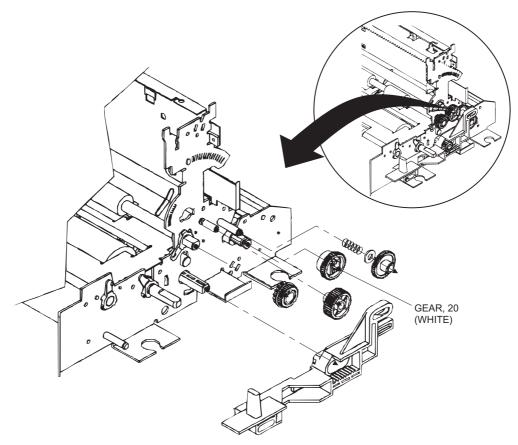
PAPER GUIDE ASSY. Removal (1)
